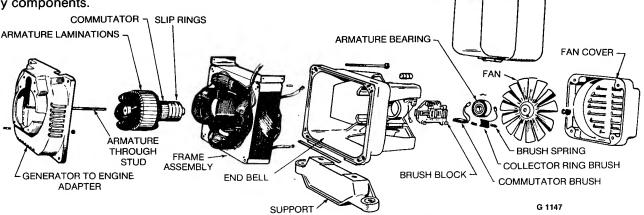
TYPICAL GENERATOR PARTS BREAKDOWN
